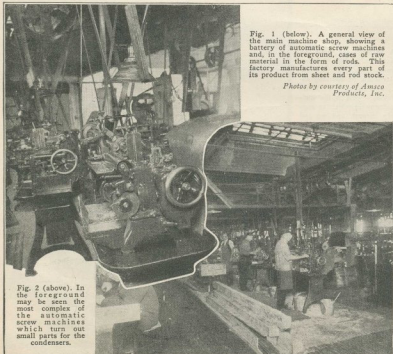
(below). A general view of the main machine shop, showing a battery of automatic screw machines and, in the foreground, cases of raw material in the form of rods. This factory manufactures every part of its product from sheet and rod stock.
